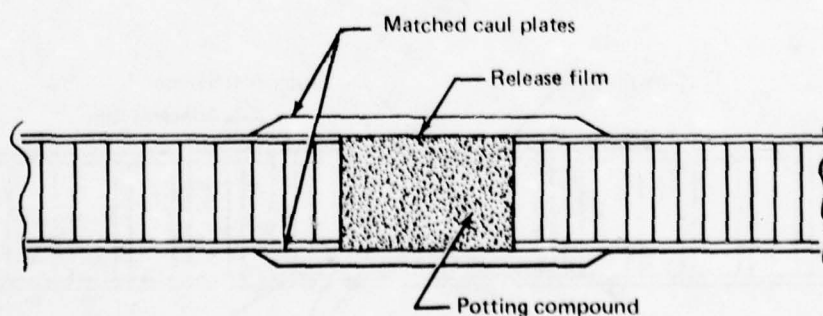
Patch Plates Used as Caul Plates to Cure Potting Compound
